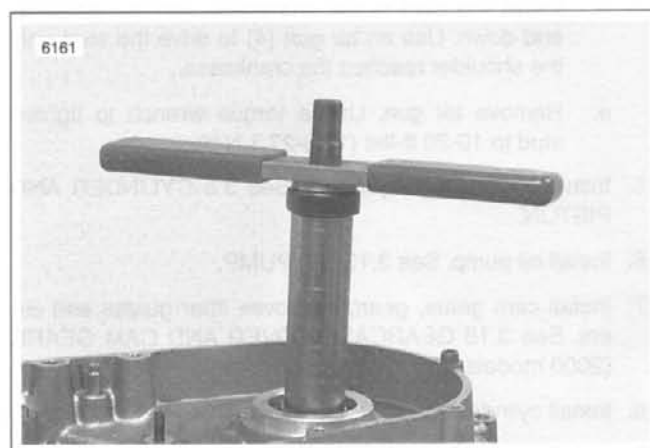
Installing Flywheel Spacer and Outer Bearing
